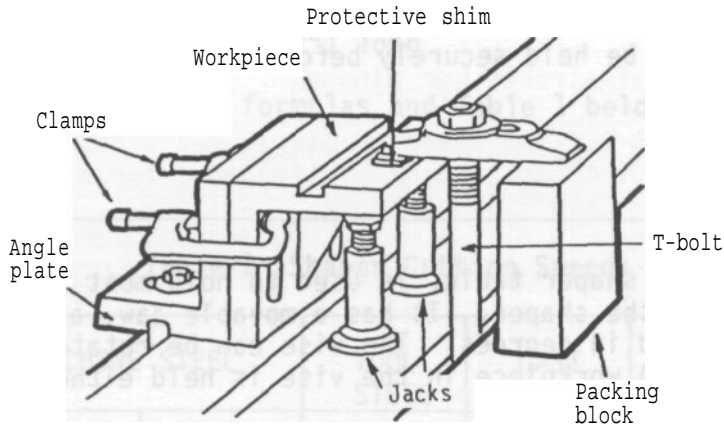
Using clamps, an angle plate, jacks, and T-bolts to secure a workpiece
